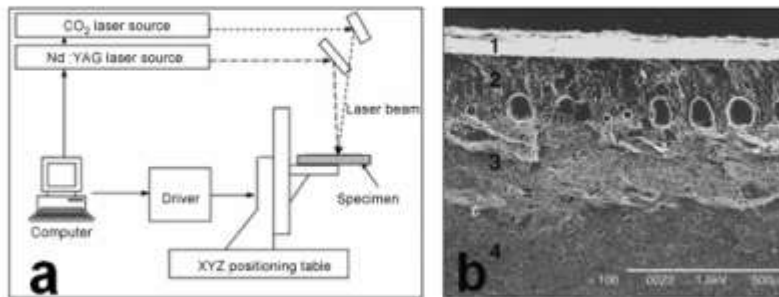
(a) Configuration of laser cutting using controlled fracture technique. (b) Fracture surface of alumina substrate. (After Tsai and Chen<sup>16</sup> with permission. Copyright Elsevier.)
